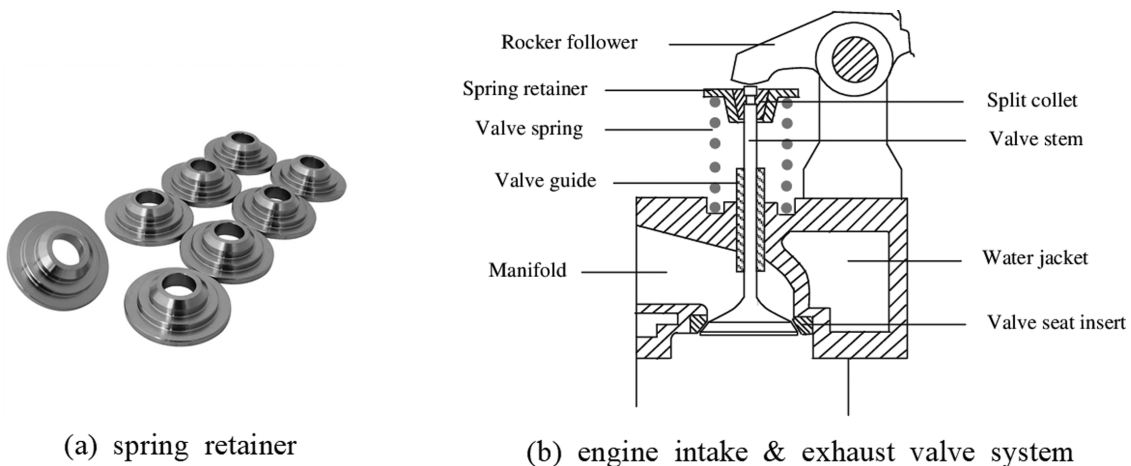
spring retainer and engine intake & exhaust valve system structure [1].
